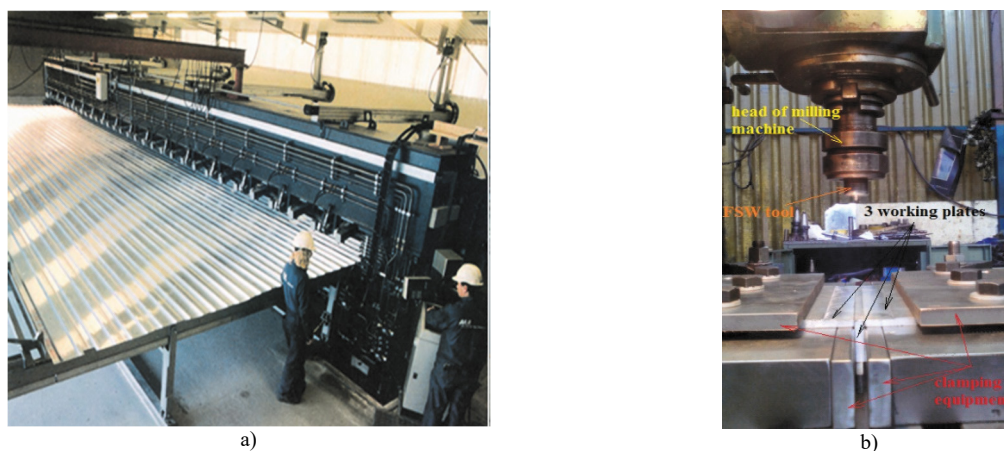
a) ESAB SuperStir, working space 6x16m [4], b) Milling machine
